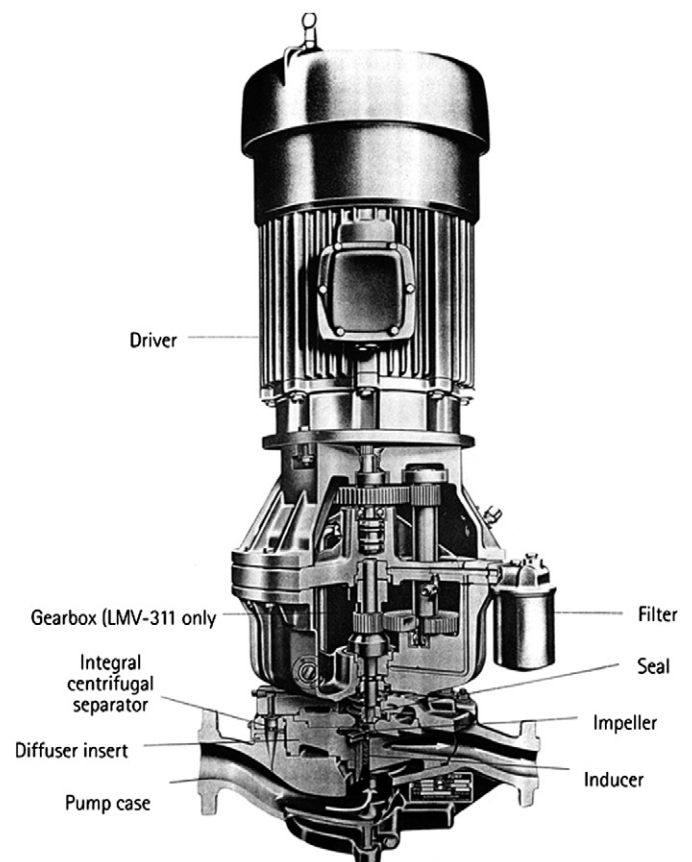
• Integral gear centrifugal pump (Courtesy of Sunstrand Corp.)
